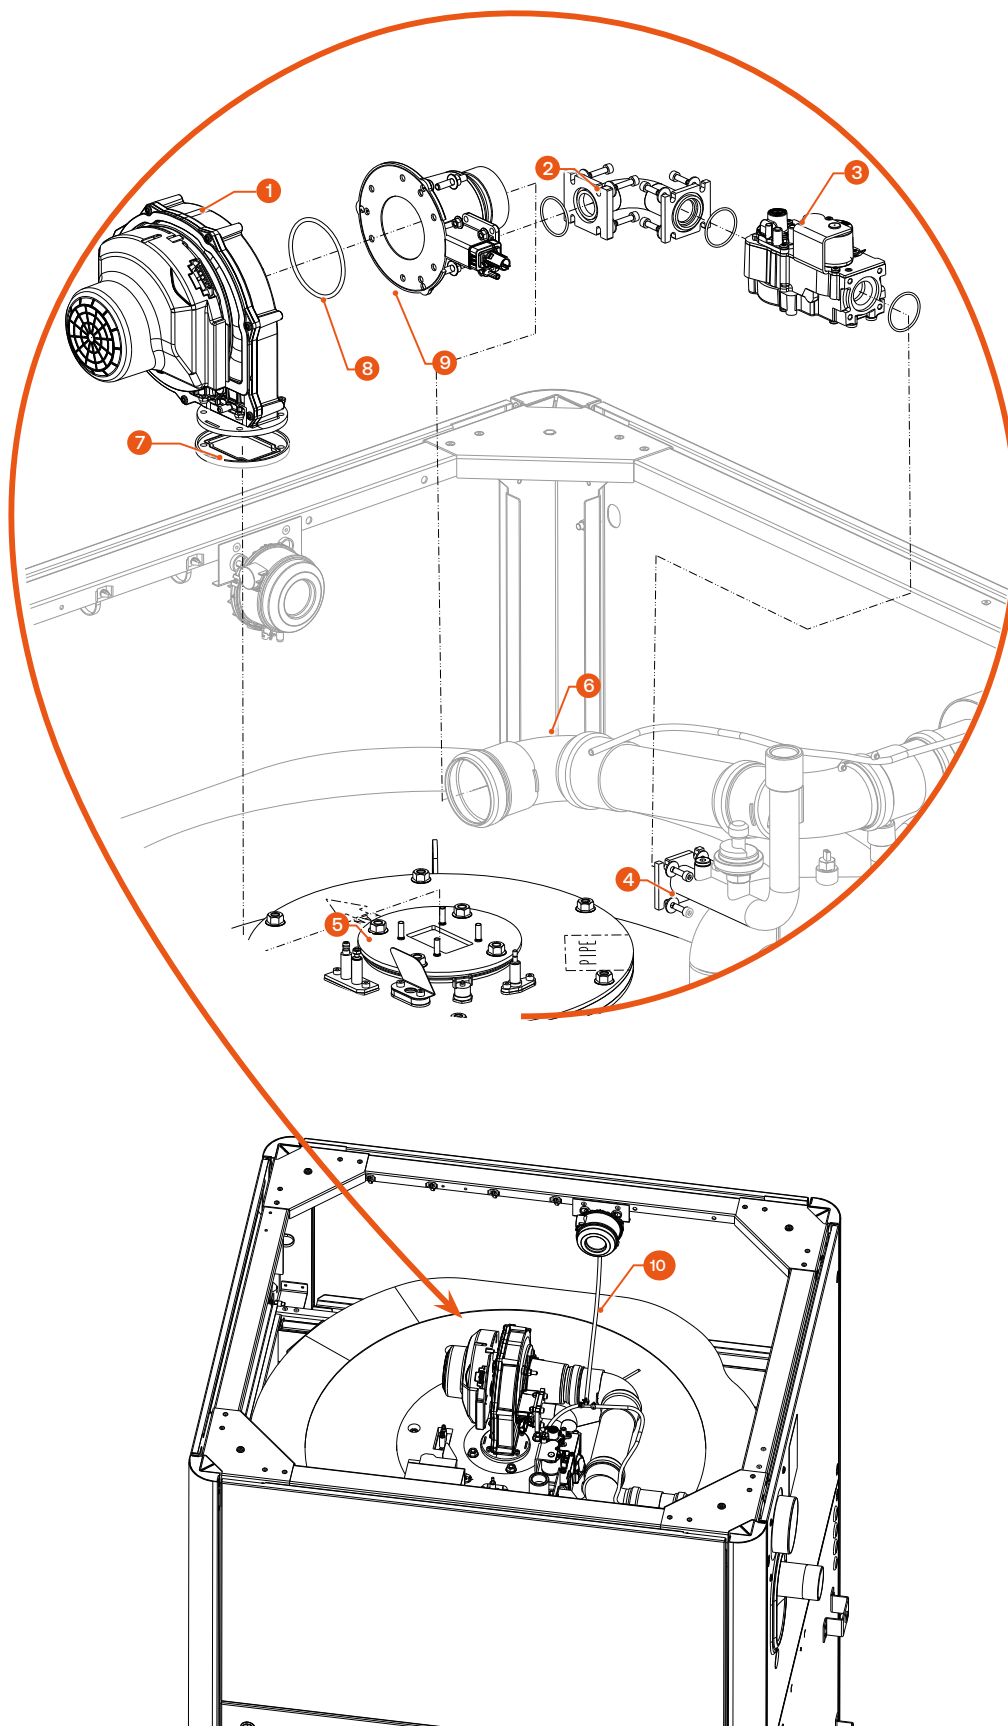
TEXAS 99 - Removing and Installing the Fan/Venturi Assembly and Gas Valve
